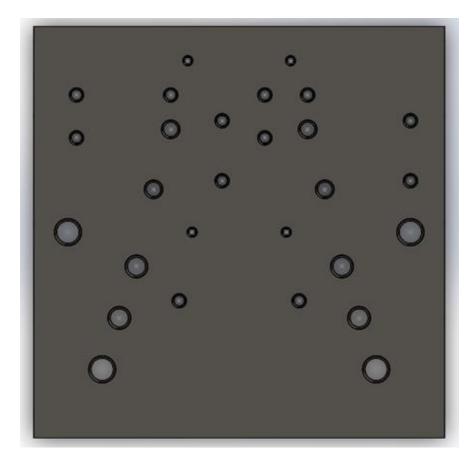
OLD REVISION OF SMALL ELECTRIC UNITS MOUNTING PLATE
